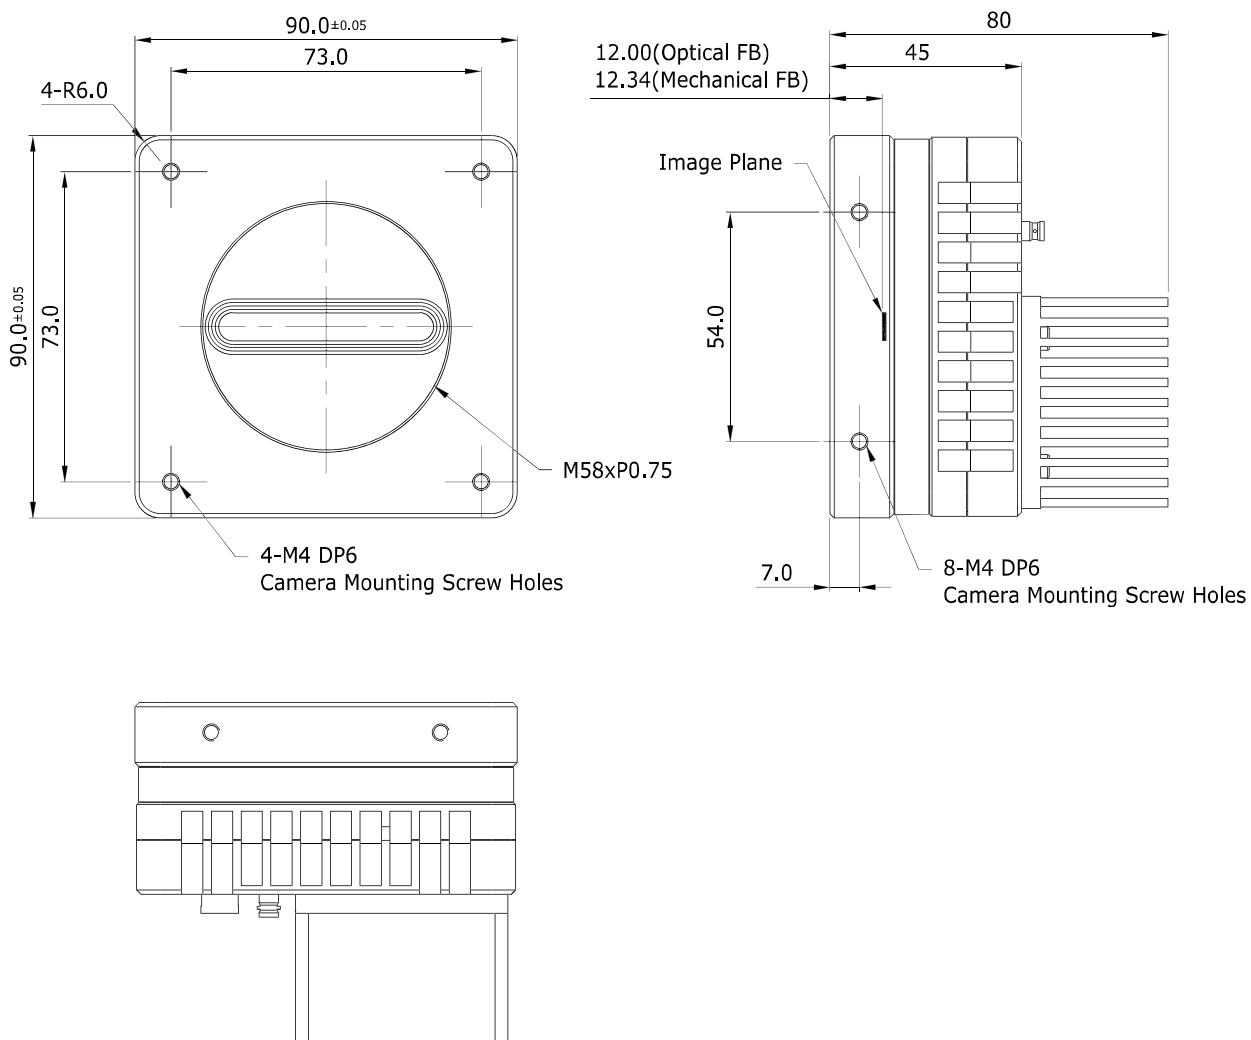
VTS-9K5X2 Mechanical Dimension
